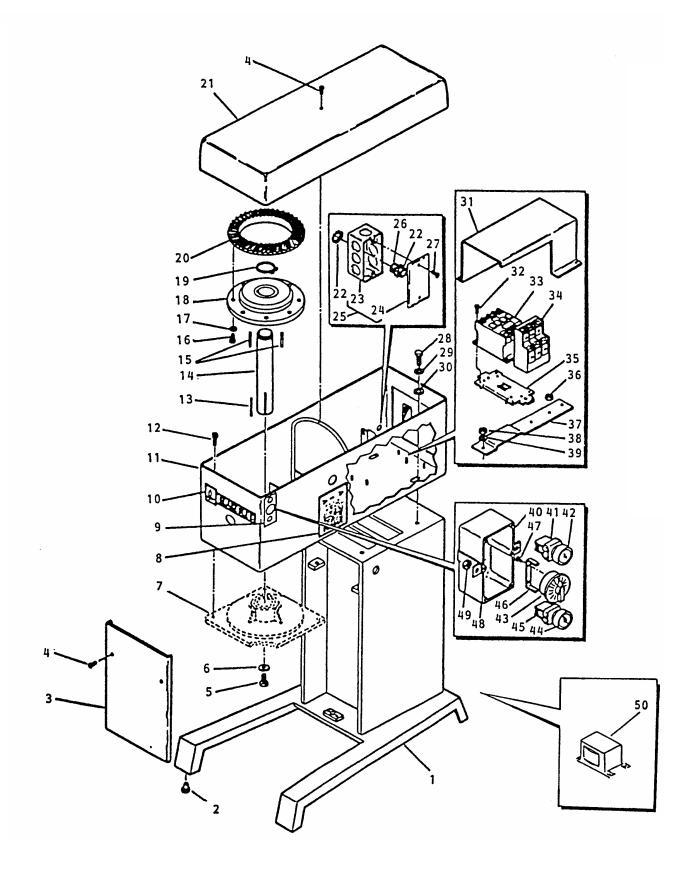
COLUMN WELDMENT, UPPER HOUSING, MAIN SHAFT AND ELECTRICAL COMPONENTS
